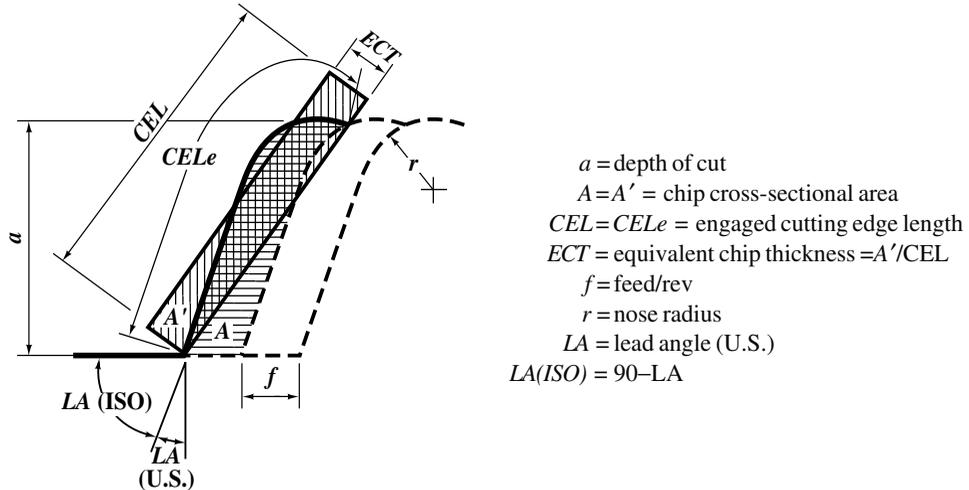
Cutting Geometry, Equivalent Chip Thickness, and Cutting Edge Length
